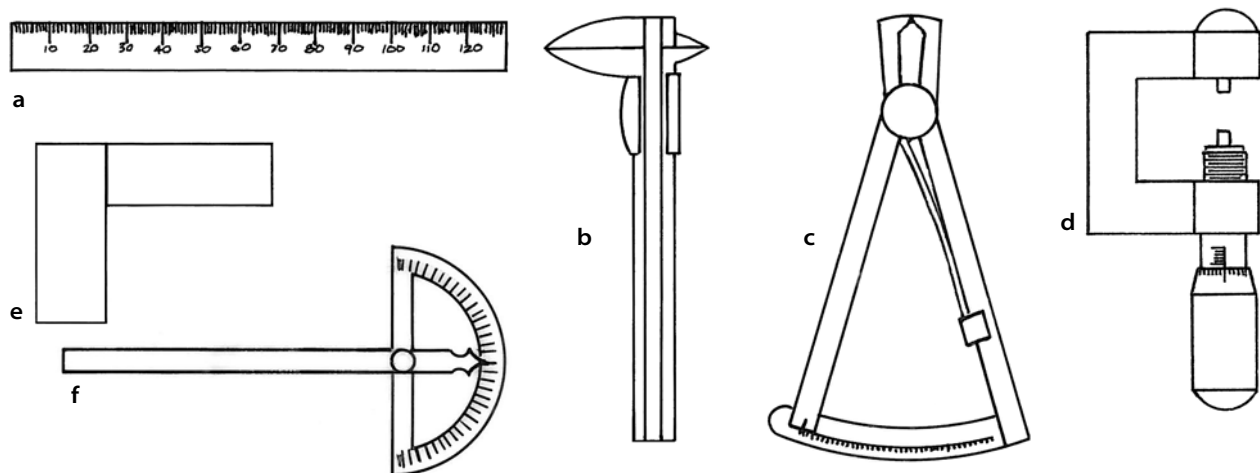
Measuring tools: a. metric ruler; b. slide caliper; c. spring gauge; d. micrometer; e. small machinists square; f. protractor
